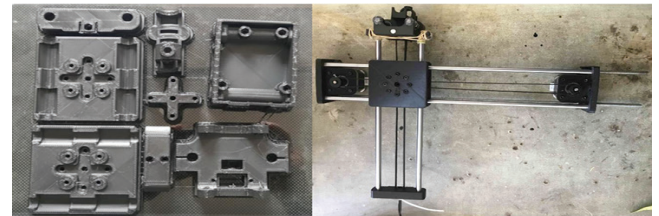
3D-Printed CNC Parts and Assembled CNC
